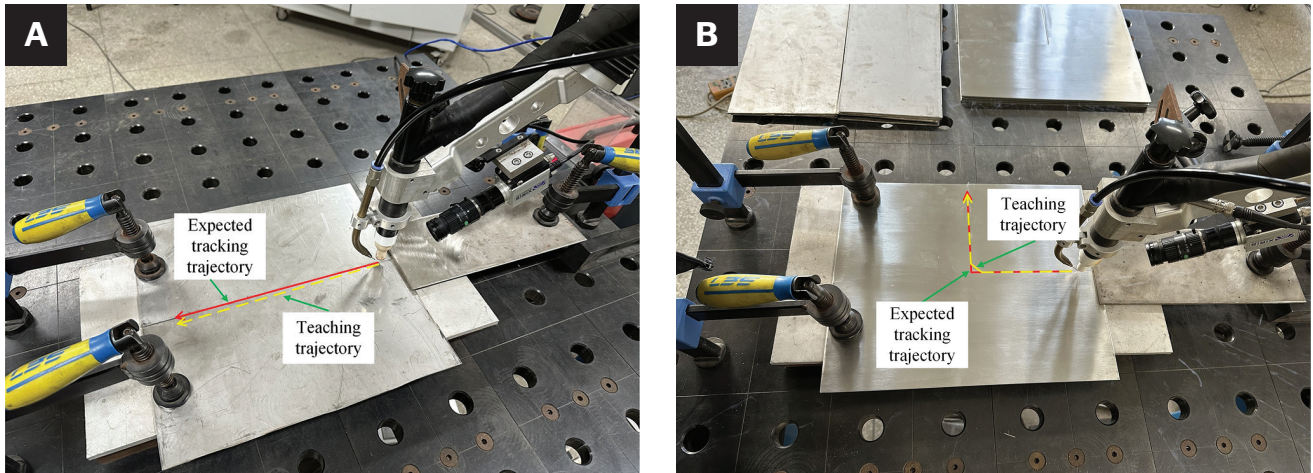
GTAW teaching trajectory and expected tracking trajectory: A — Straight-line welding seam; B — right-angle welding seam.
